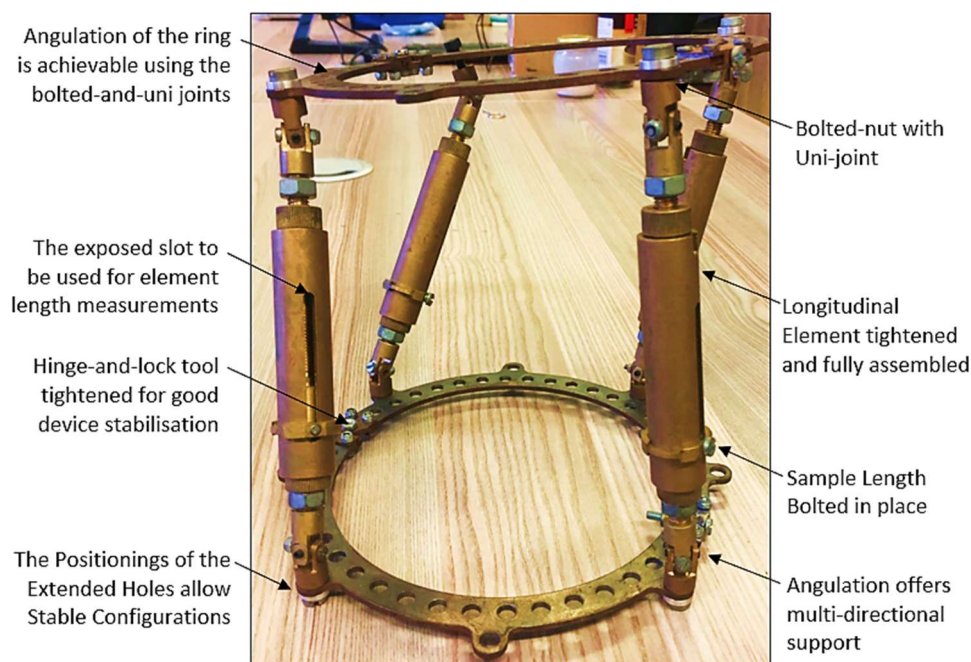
Image illustrating the physically assembled form of the Adaptive Bone Fracture Fixation System, as well as detailing the key design features that can be fully utilized when applying the Adaptive External Ring Fixator for bone fracture fixation.
